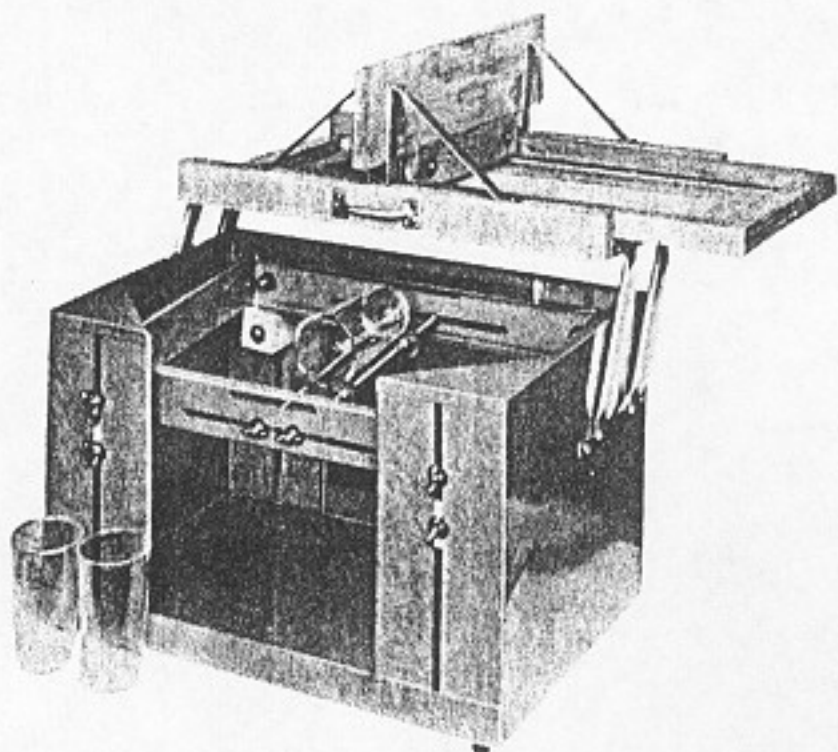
A special jig press for printing other than flat objects. Glasses, tumblers, jars and bottles are printed in this manner.
